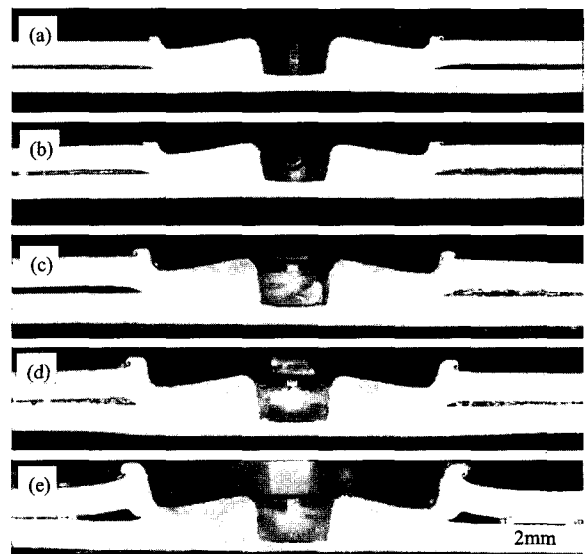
Cross-sectional macro images of spot FSW joints with tool insertion depth at 2500 rpm: (a)1.45, (b)1.5, (c)1.55, (d)1.6 and (e)1.65 mm
